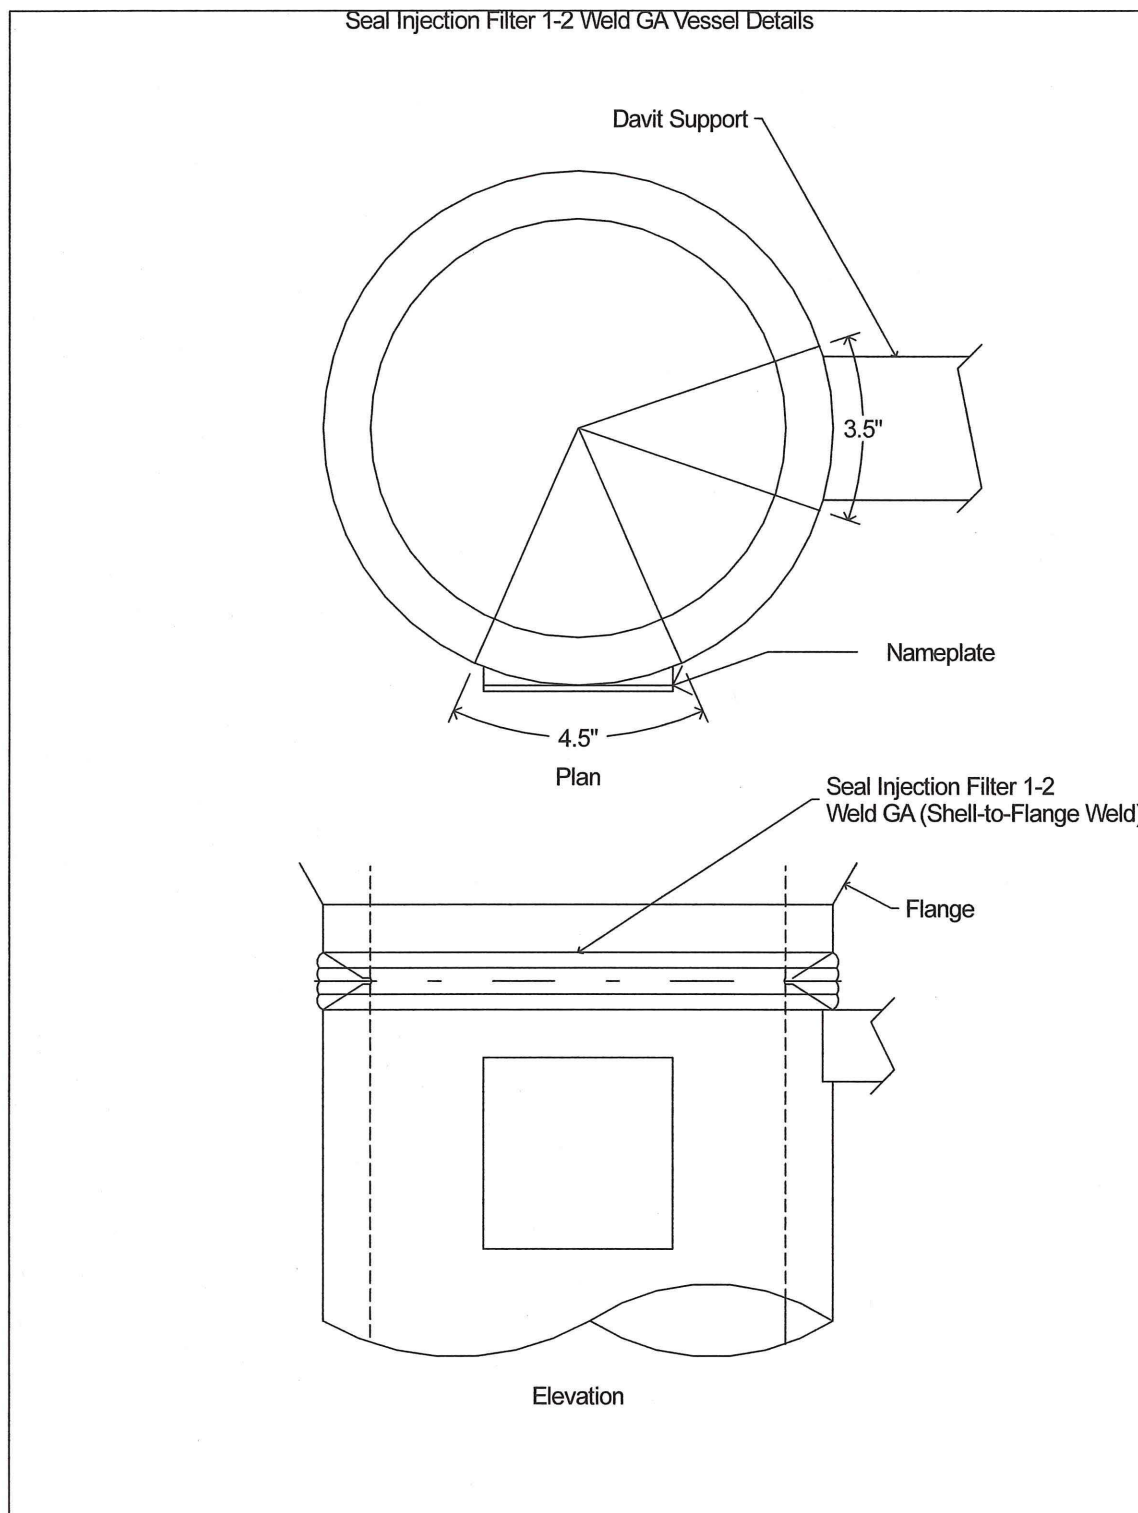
Shell-to-Flange Weld GA Layout
